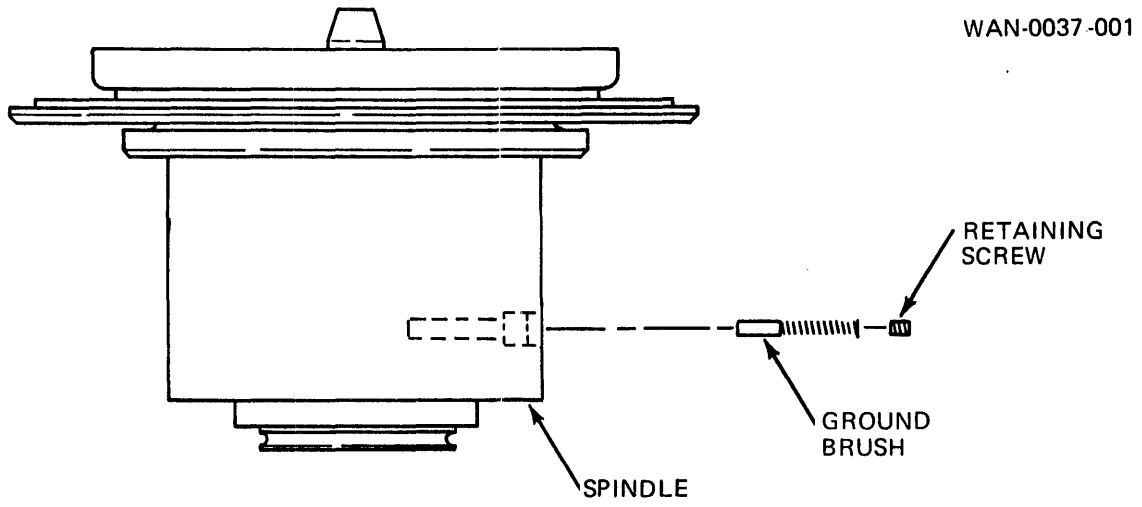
Spindle Shaft Ground Brush – Mounting
